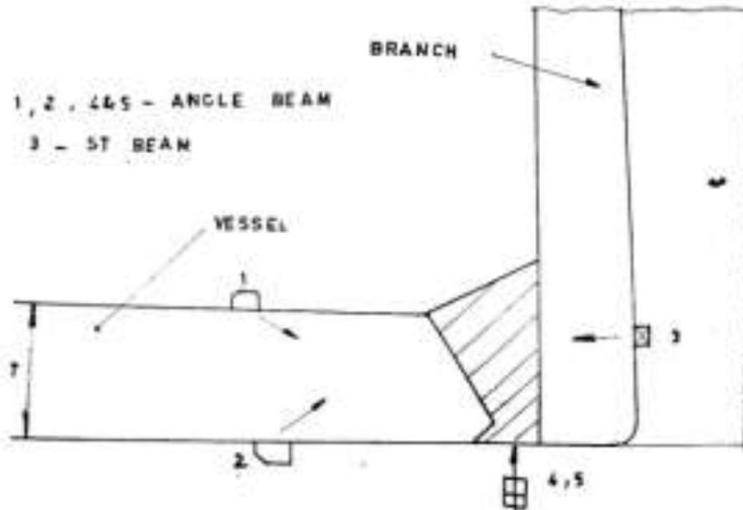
SCANNING DIRECTION- FULL PENETRATION CORNER WELD (SET-THROUGH)
